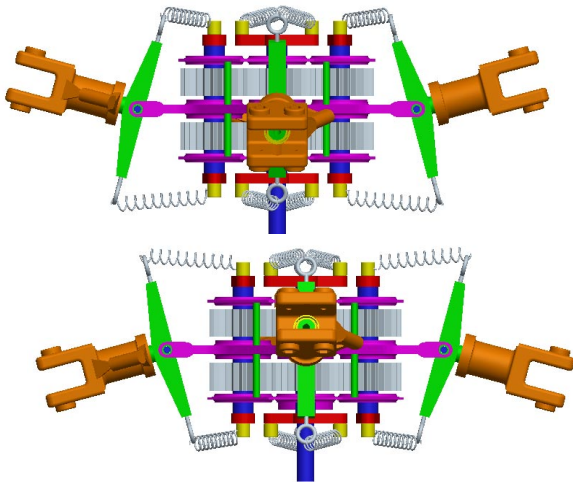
Side views showing flapping displacements, 90 degrees apart
